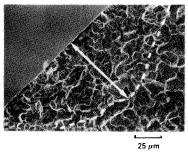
Example of the fractured surface after rotating bending fatigue test
